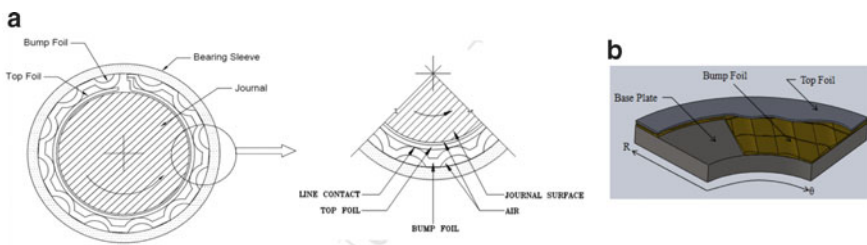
Configuration of foil journal and thrust bearings. a Foil journal bearing [4]. b Foil thrust bearing [5]
